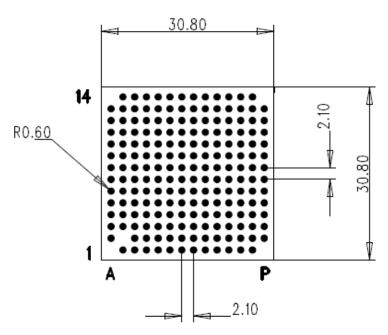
TQMa28L, recommended carrier board footprint, top view through TQMa28L
